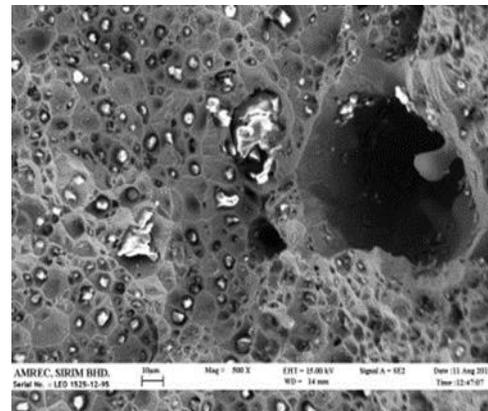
SEM fractograph for tensile for the injection moulded 316L stainless steel samples
